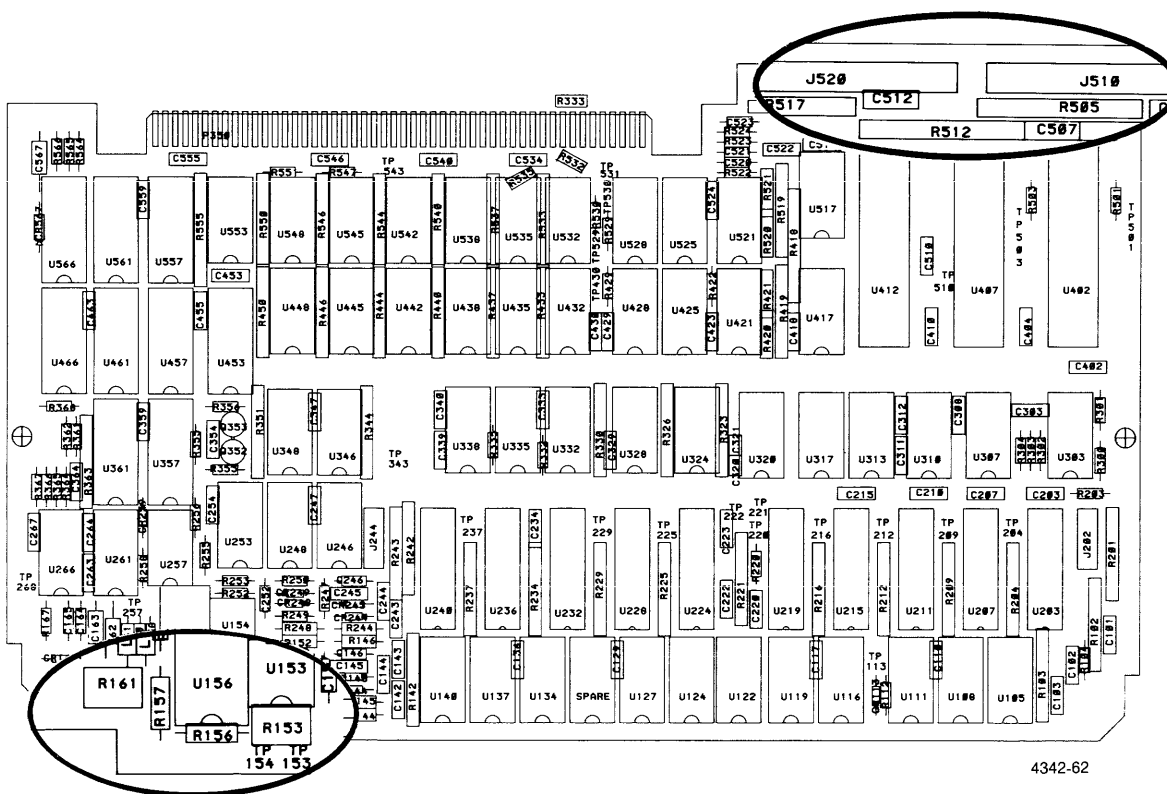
Expanded view of 1240D2 18-Channel Acquisition Board shows components used in the Threshold Adjust.
